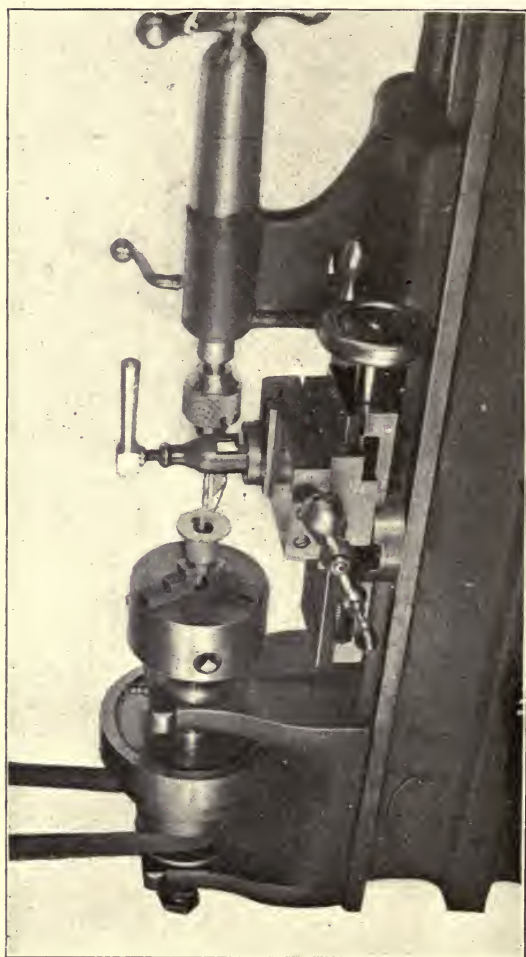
CENTERING AND DRILLING INLET VALVE CASING FOR VALVE STEM.
